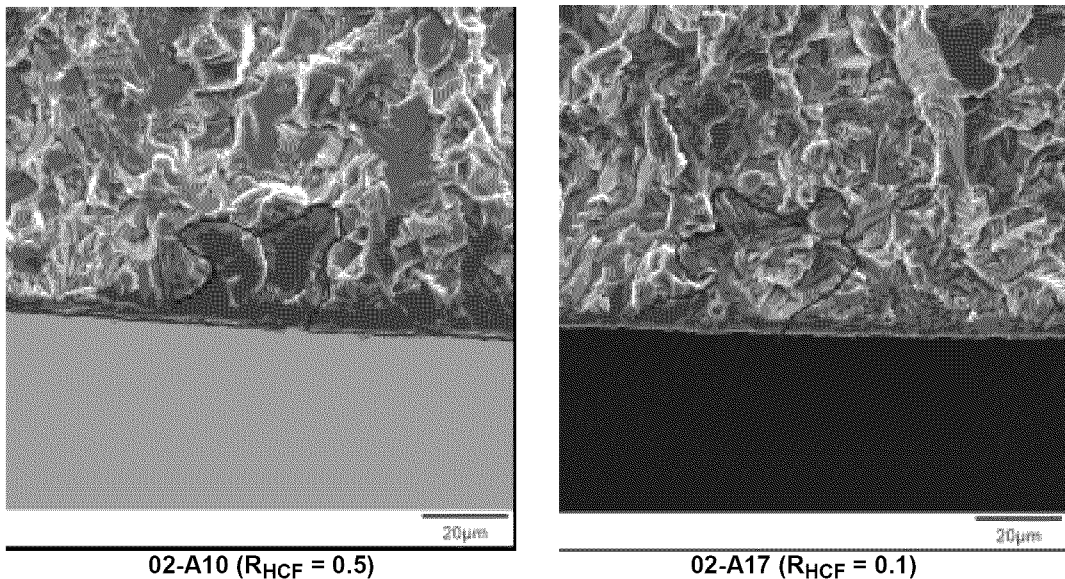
Fracture surfaces of specimens subjected to preload at $R=-3.5$.
